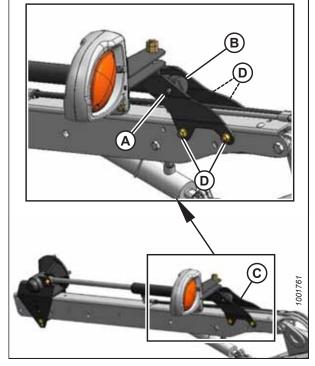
Left Reel Arm Cylinder in Forward Position
